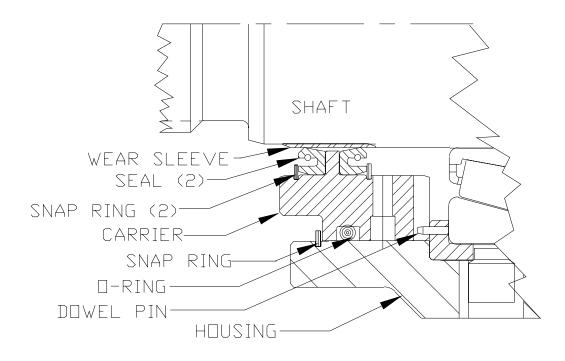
Install the seals into the carrier, and install the carrier into the housing
